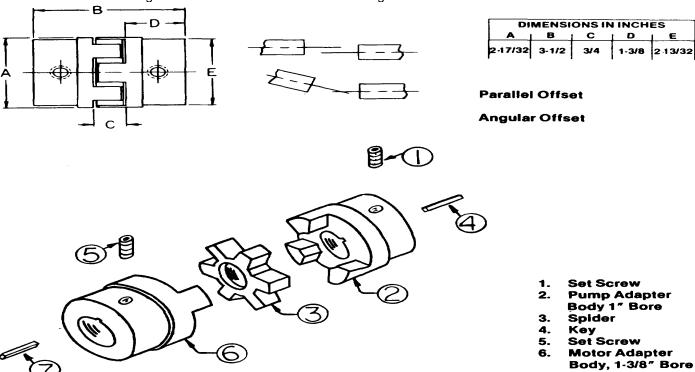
CIRCULATING PUMP AND MOTOR COUPLING
